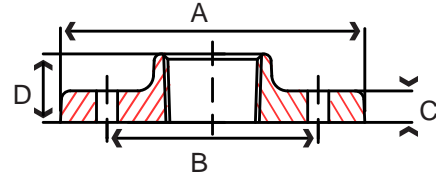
HF1 – 125 lb. Threaded Hydrant Flange
